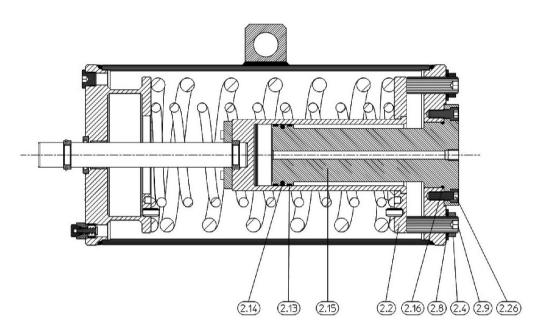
Hydraulic cylinder seals replacement of single acting actuator
